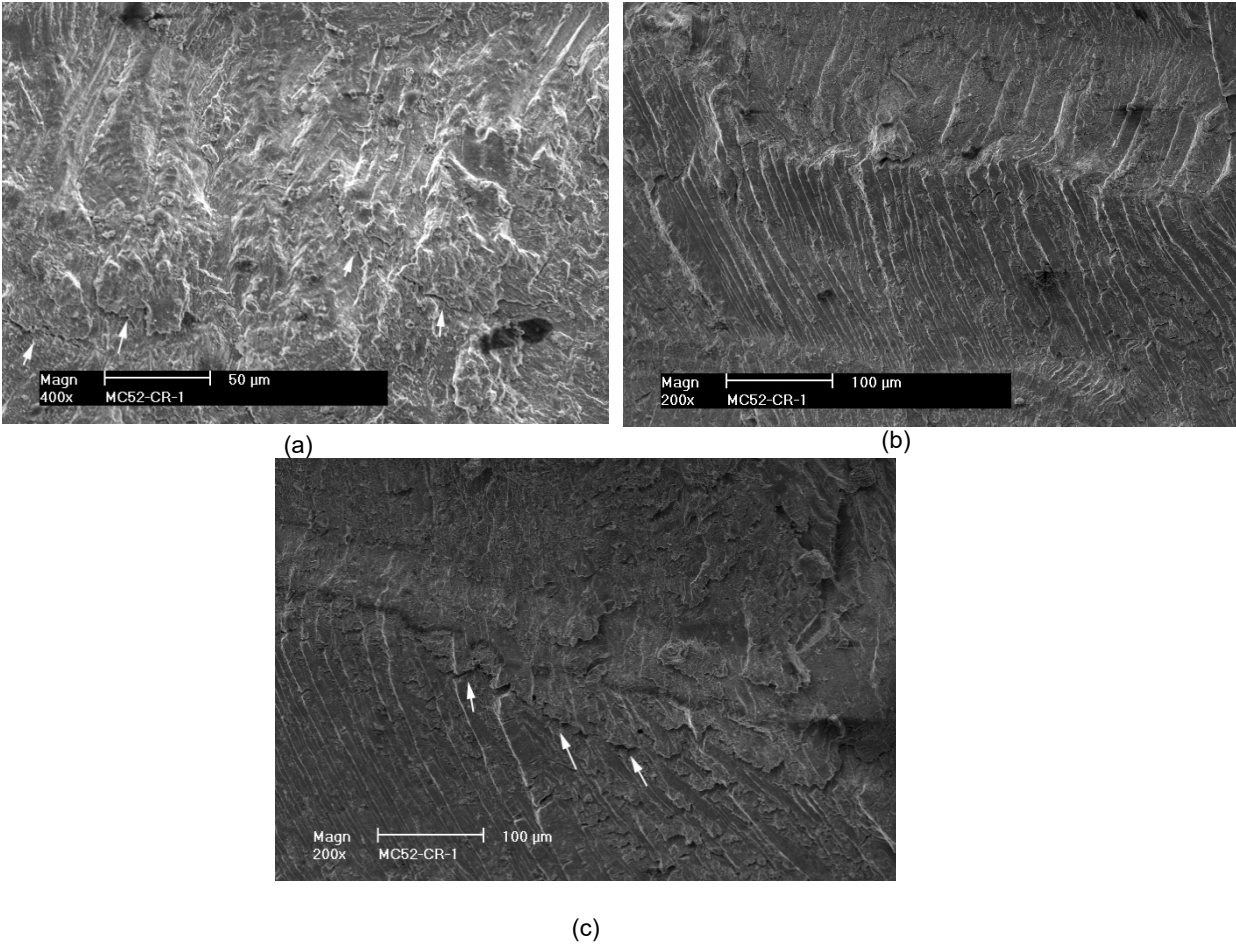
Fracture surface of specimen MC52-CR-1 at location (a) 1, (b) 2, and (c) 3 in Figure 103. Crack advance is from bottom to top.
